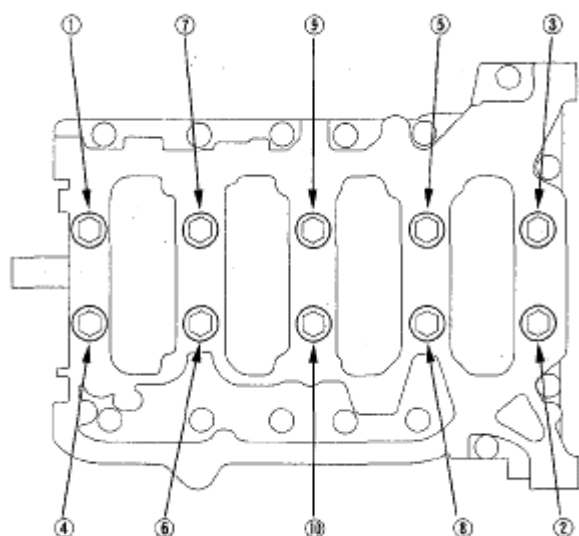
Identifying Bearing Cap Bolt Loosening Sequence
